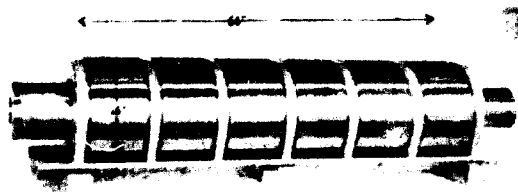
Backing roll from a Sendzimir cold-strip mill.
